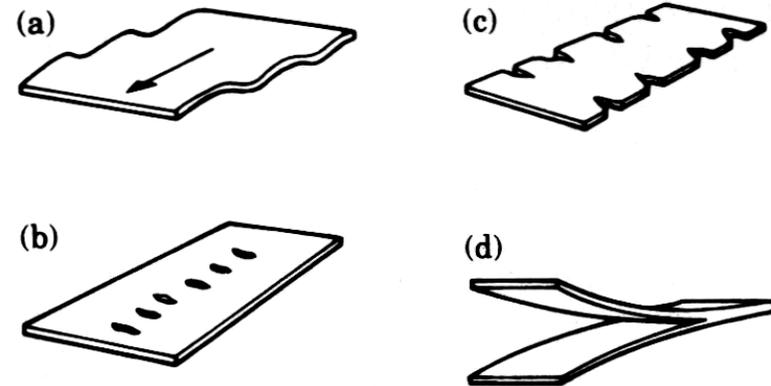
Schematic illustration of typical defects in flat rolling: (a) wavy edges; (b) zipper cracks in center of strip; (c) edge cracks; (d) alligating.
